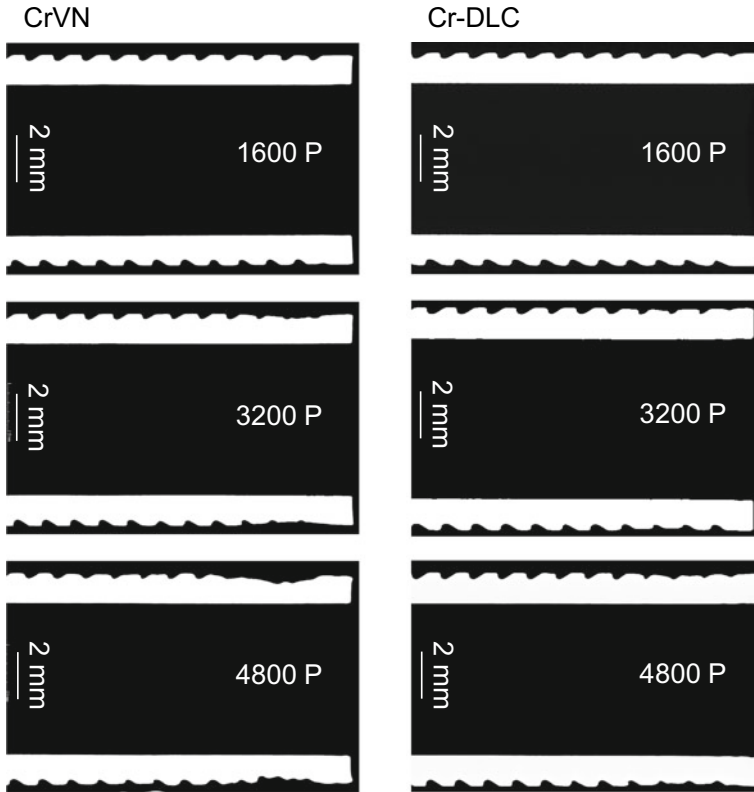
CT images of CrVN (left) and Cr-DLC tool (right) after 1600, 3200 and 4800 welds
